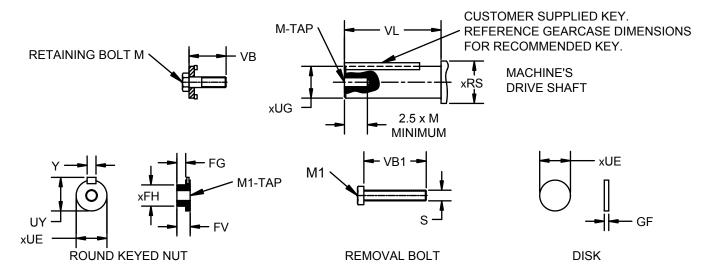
Straight Hollow Bore Assembly/Disassembly
